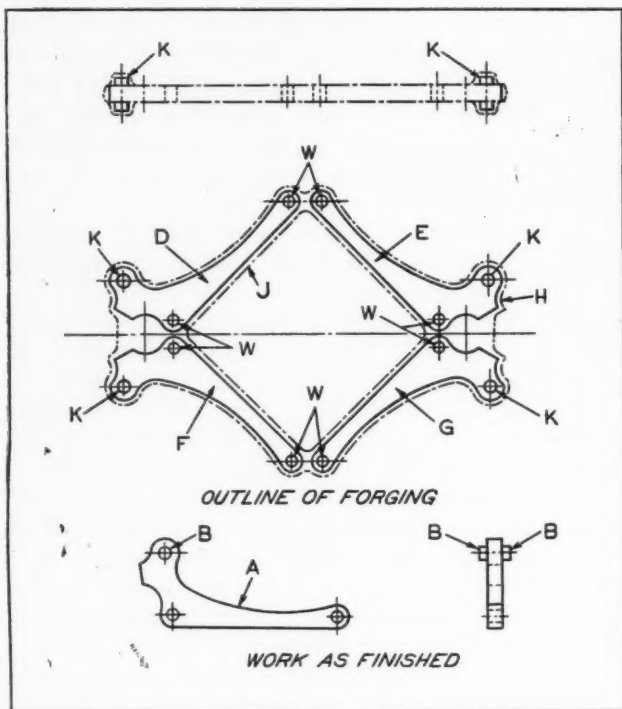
Group Forging of Four Trip Pawl Levers and a Finished Lever
